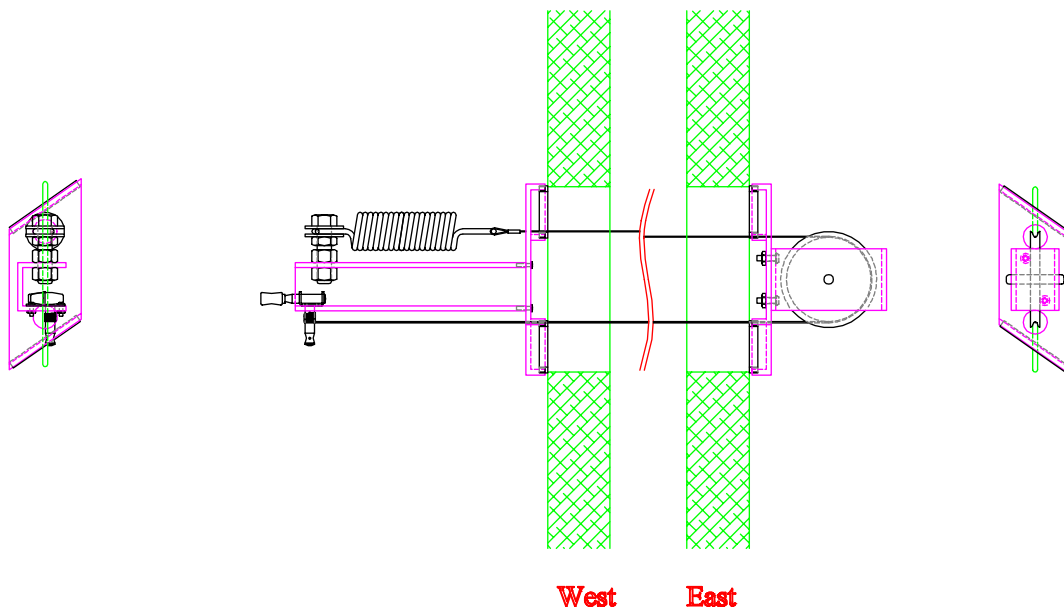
Fixture used to pre-tension the Can before installing the wire planes and field sheets.
